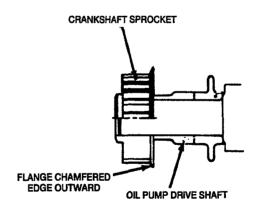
INSTALLING CRANKSHAFT SPROCKET
